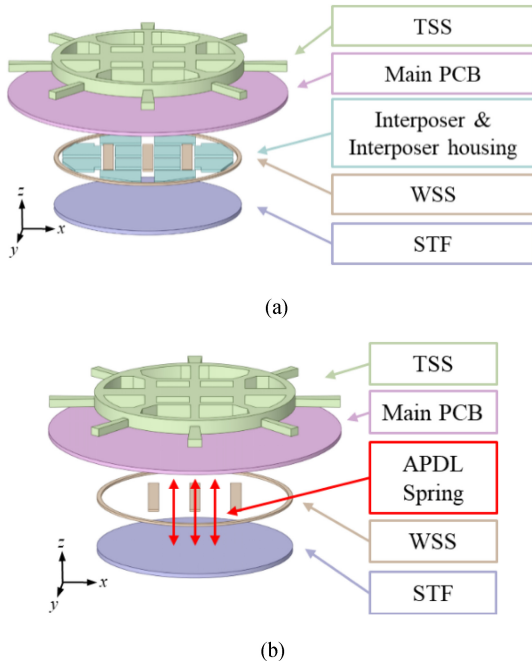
Finite element model of the probe card assembly. (a) Base model, with interposer & interposer housing, (b) Model 1&2, without interposer & interposer housing
